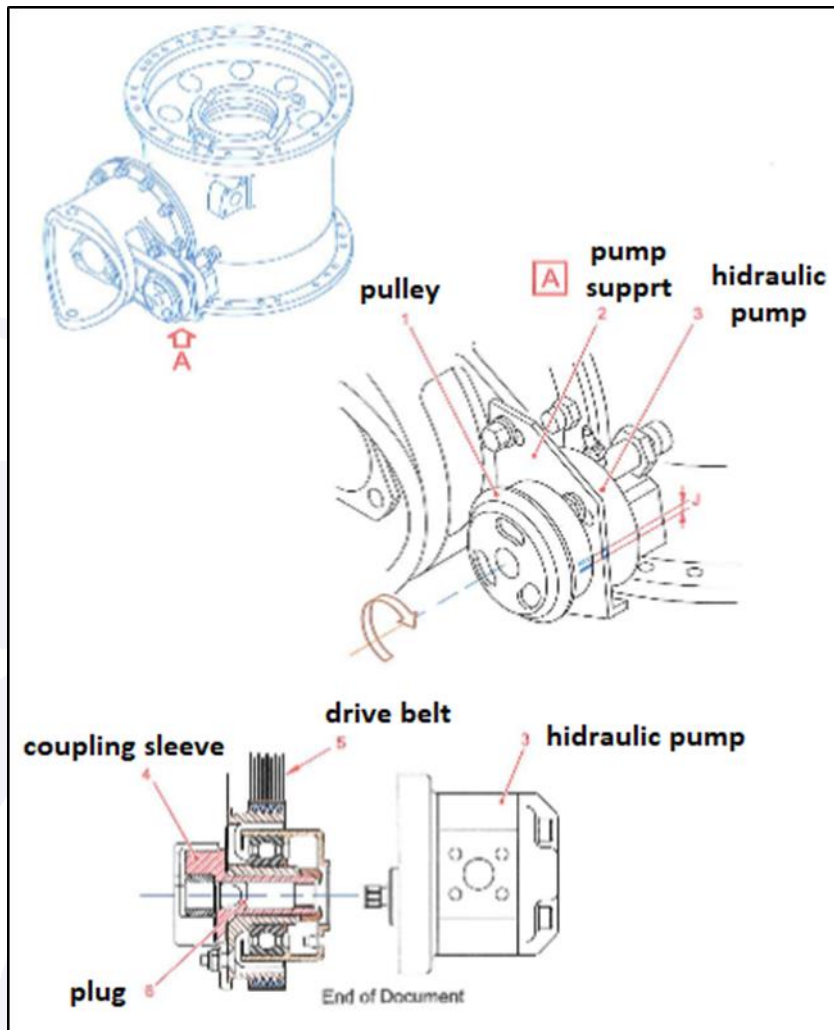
Inspection Criteria - Hydraulic Pump Spline Belt Drive.
